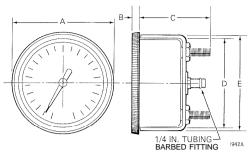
Flush-Mounted Gage Approximate Dimensions. Refer to Table 2.
